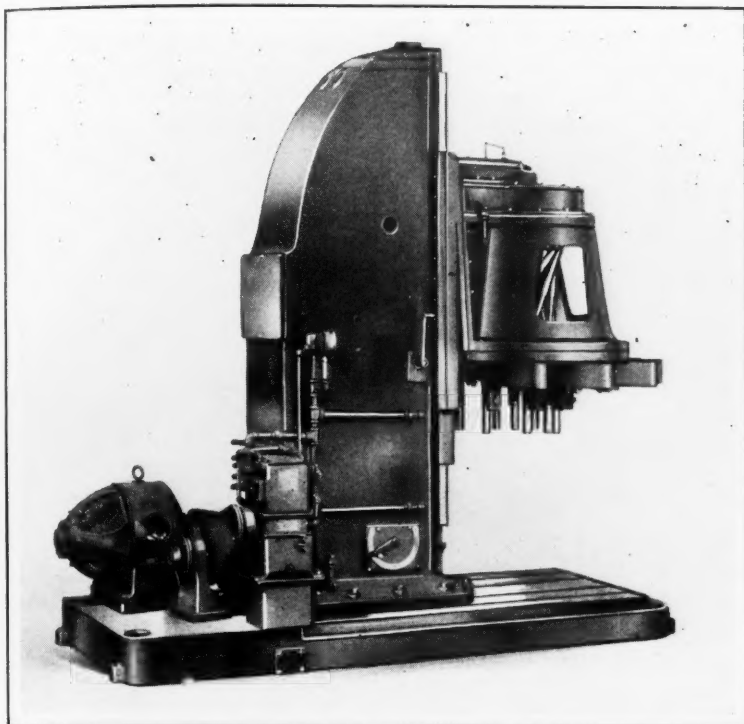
Oilgear Pump, and Motor Drive as seen from Left-hand Side of Machine
